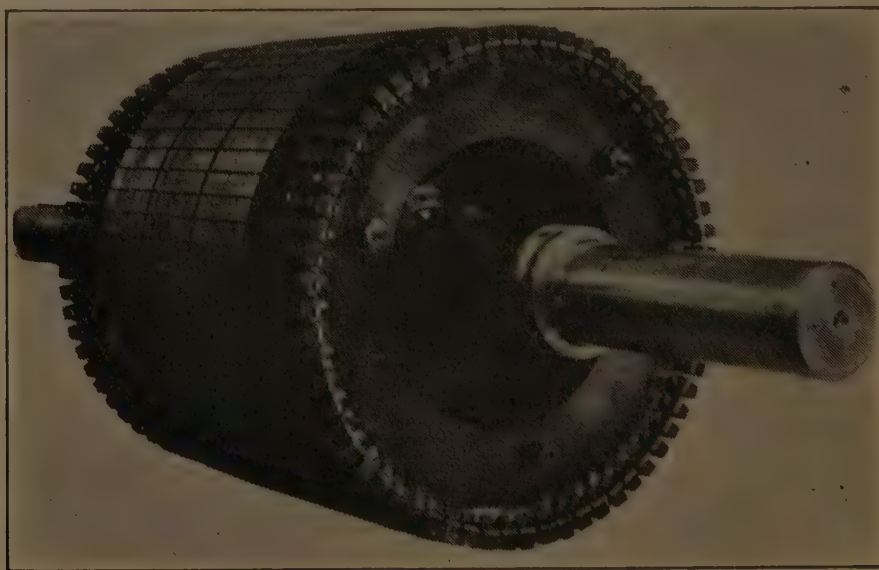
FIG. *E*.—Squirrel-cage rotor with bars tap-bolted to bent-over lugs on punched sheet-metal end rings. This construction is shown in Fig. *B(d)*.
